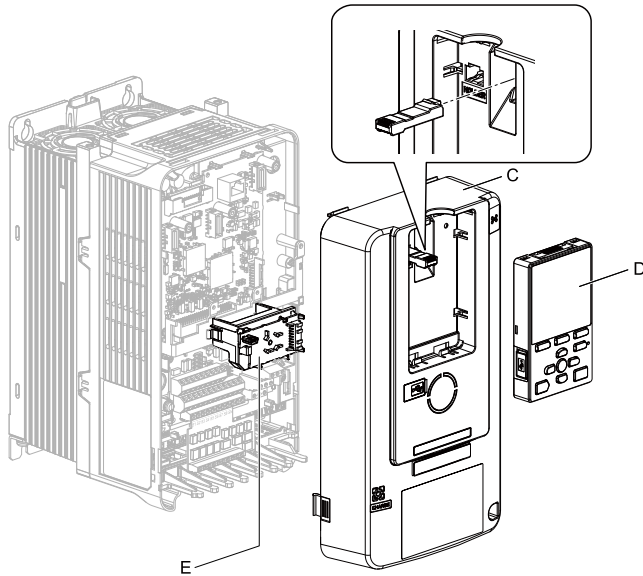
Install the LED Status Ring board, Front Cover, and Keypad
